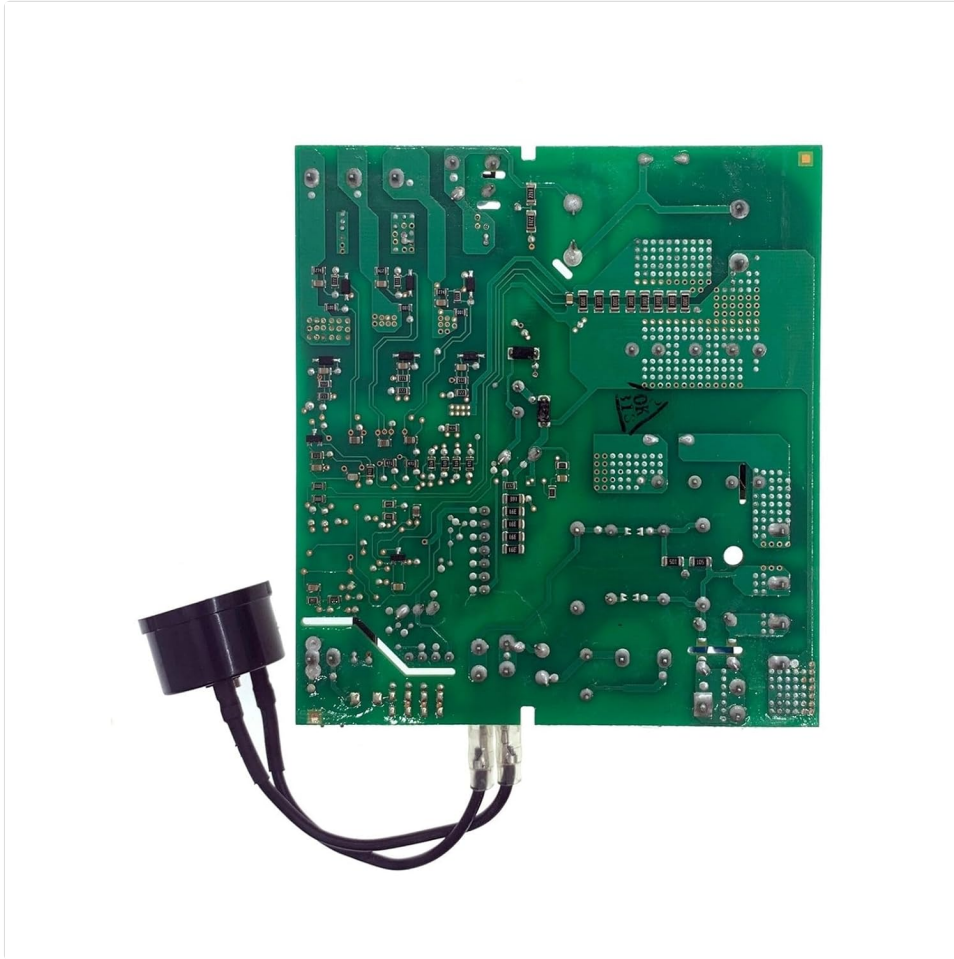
Rear view of the DONPER VFL110CY1 Refrigerator Compressor Inverter Drive Control Board. This image shows the reverse side of the control board, revealing the intricate network of solder points and circuit traces. A connected sensor or component with black wires is also visible, extending from the right side of the board.
